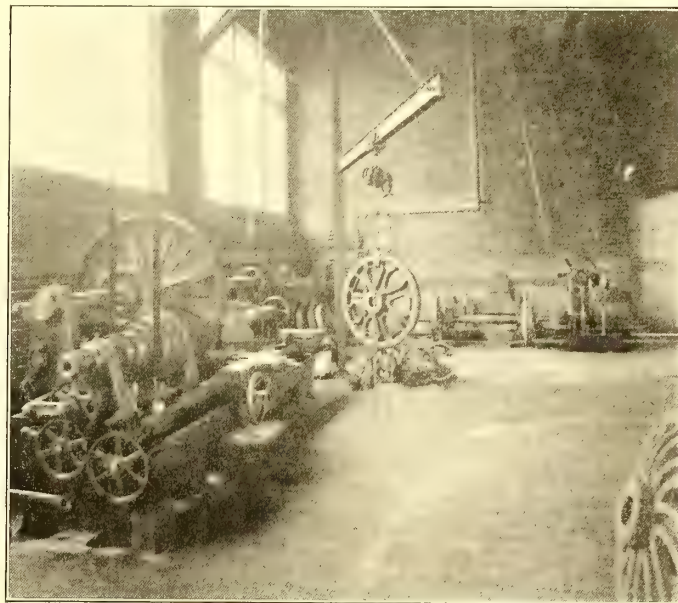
WHEEL LATHE AND GRINDER SERVED BY JIB CRANE
